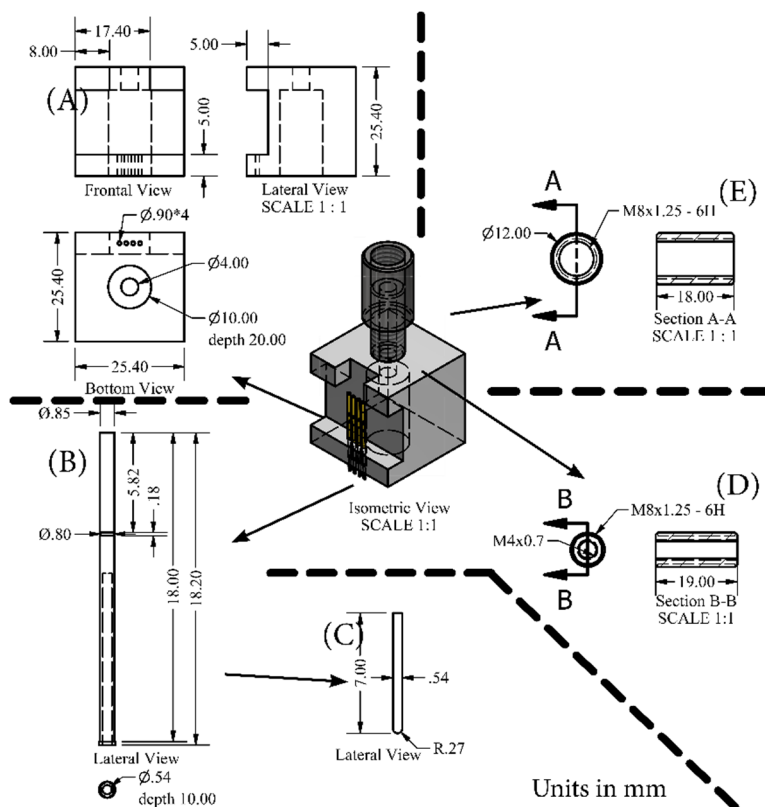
Sketch of the parts of our homemade tip holder. (A) Head to hold sleeves of the points, (B) sleeve of the gold points, (C) gold point, (D) screw to attach the head and (E) junction between Head and Dynamometer.
